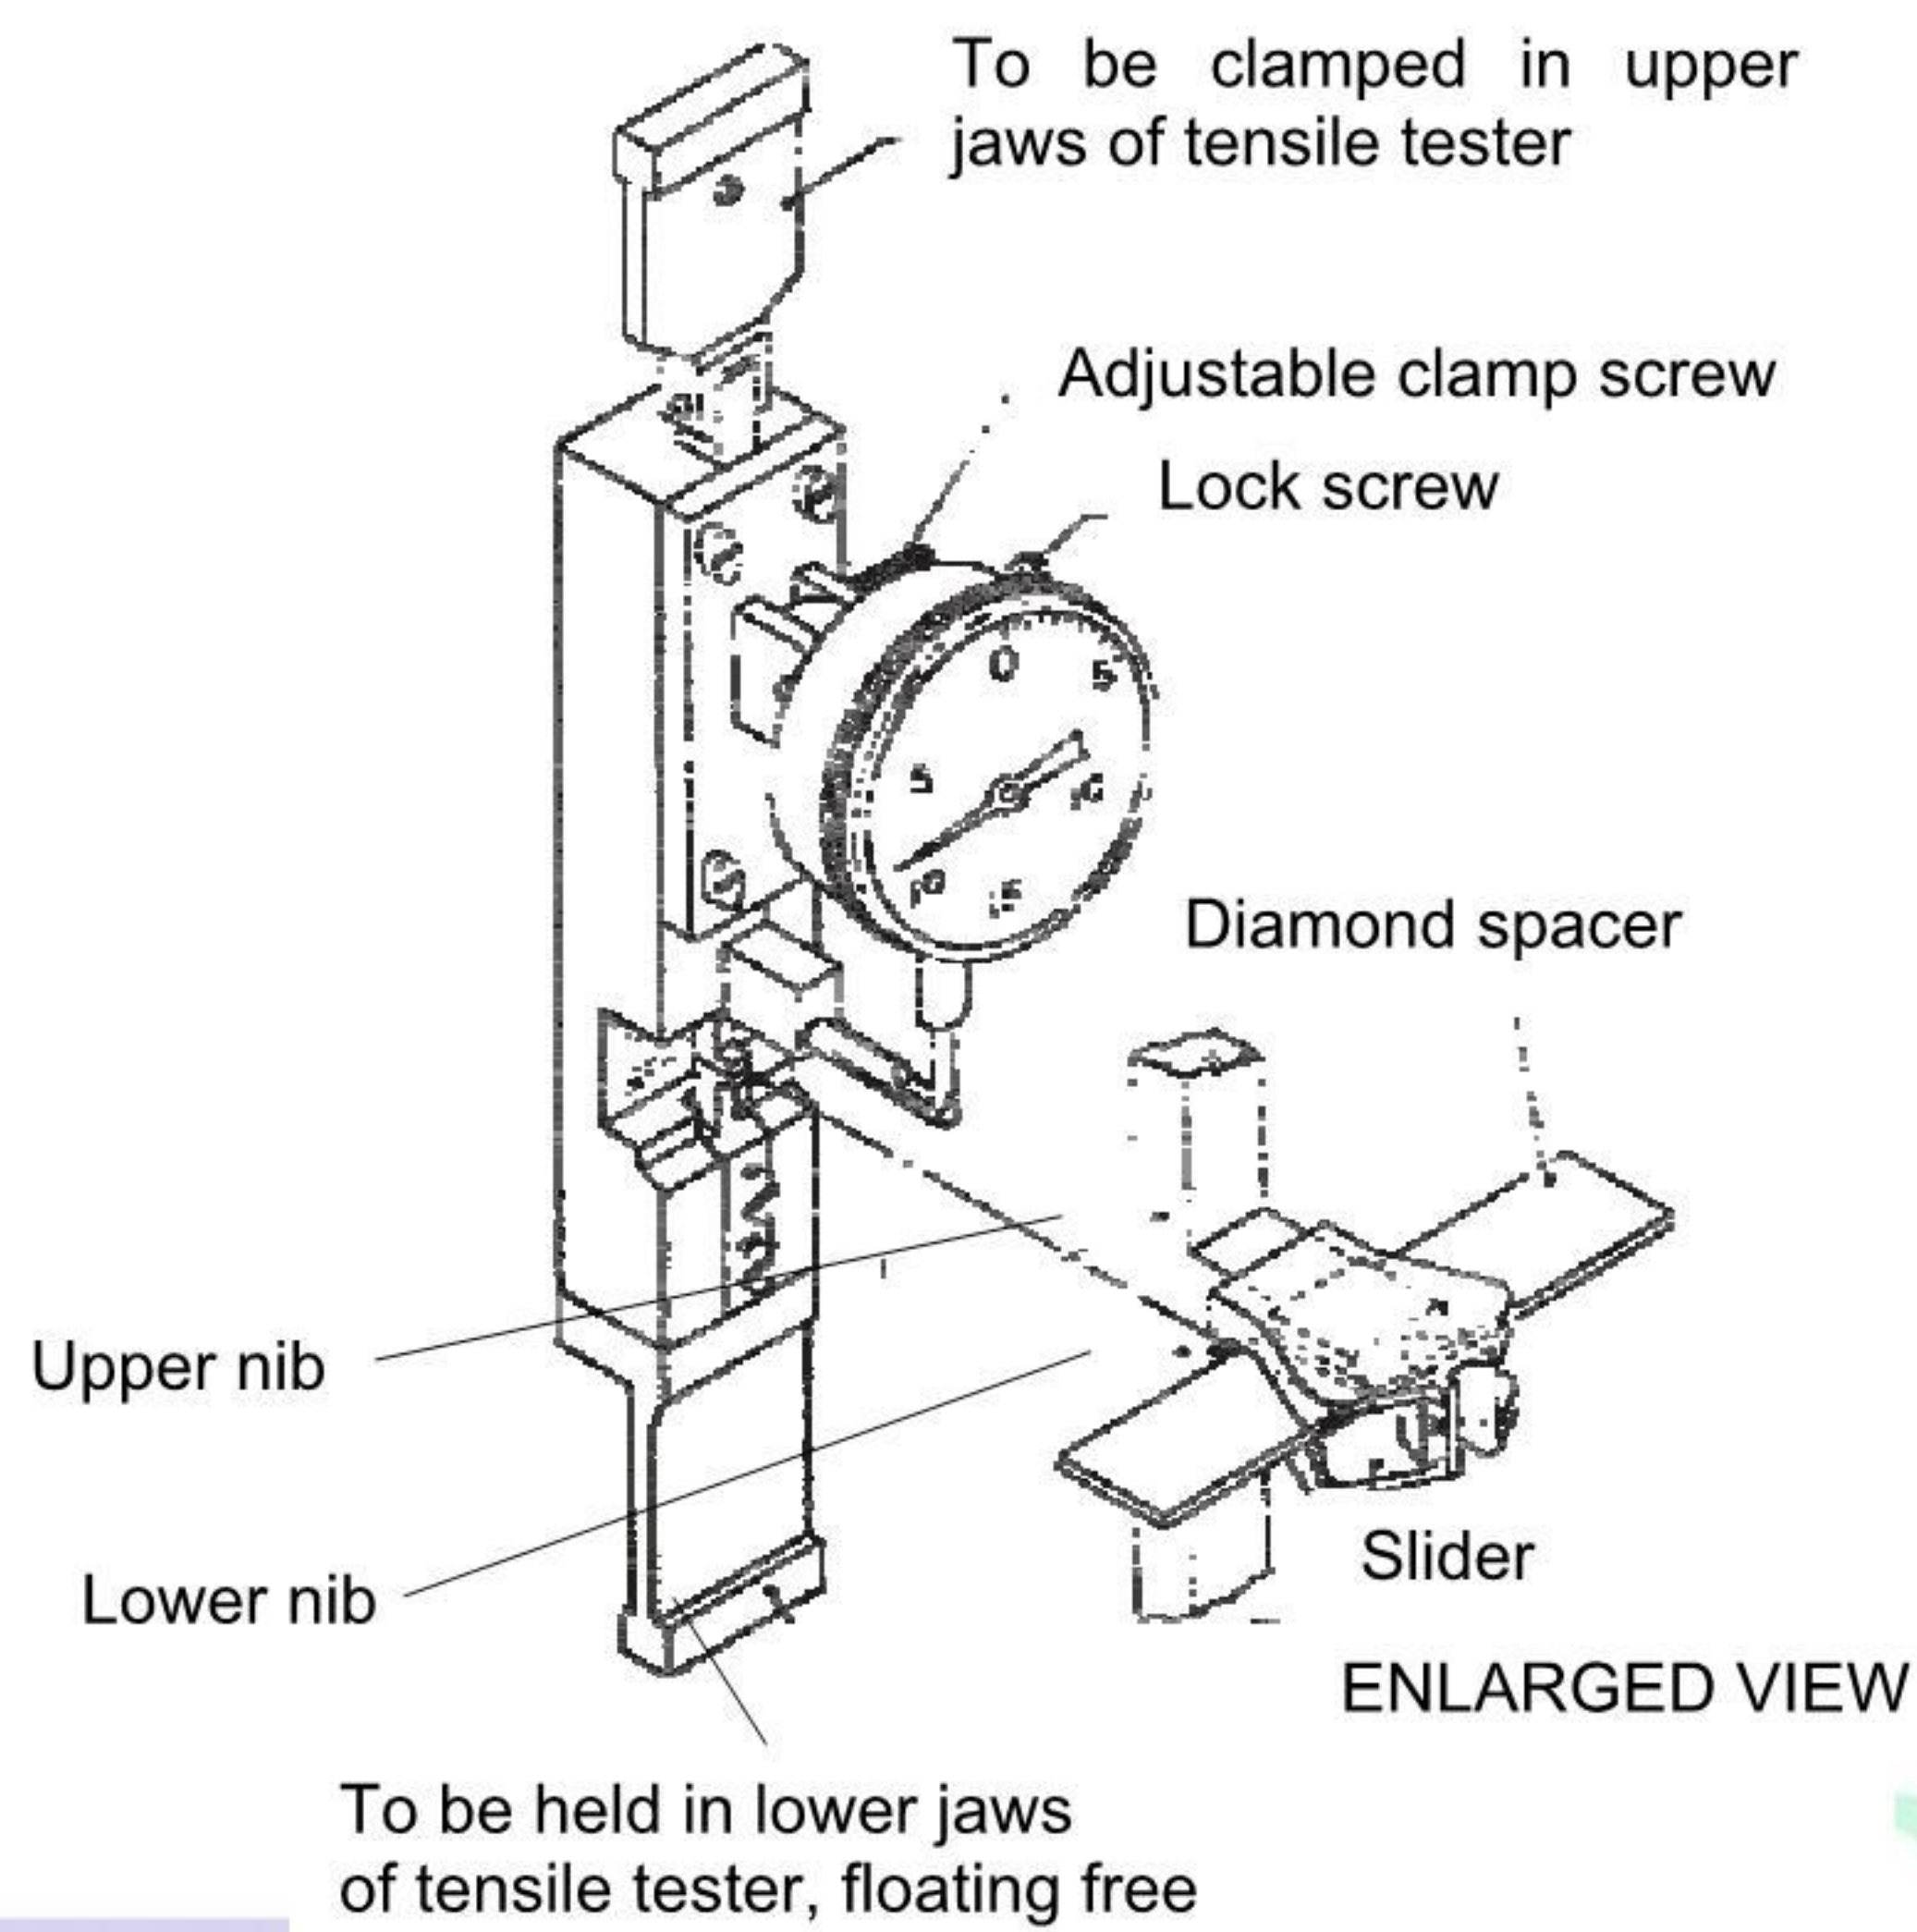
Fixture for Slider Deflections Test (Mouth)
